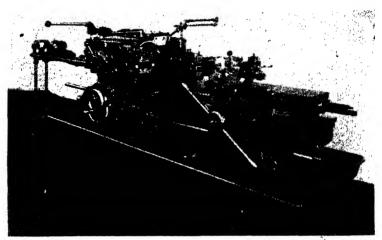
Ram-type Jones and Lamson turret lathe with a cross slide carrying cutting-off and forming tools.
